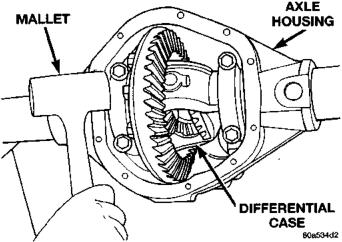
Seat Pinion Gear Side Differential Dummy Side Bearing
